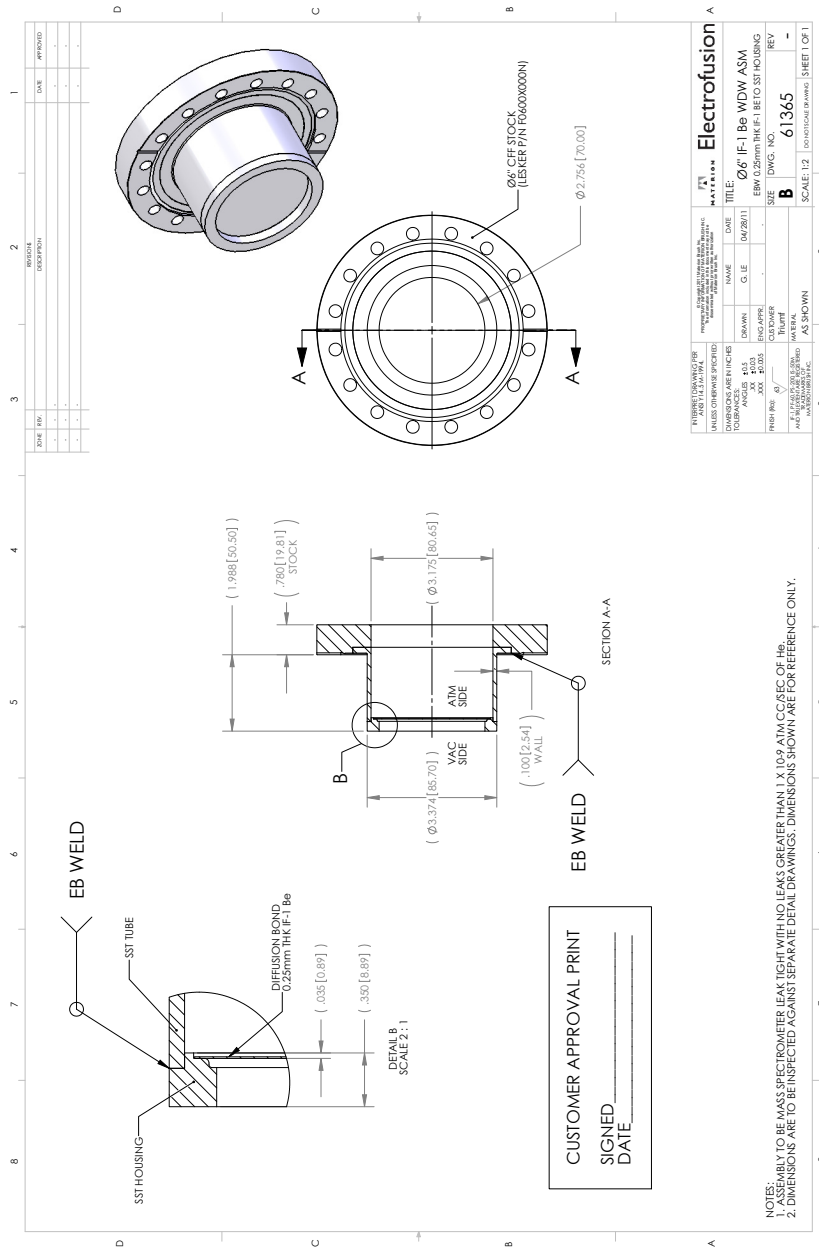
Technical drawing of the 6" diameter Be-window assembly [172].
